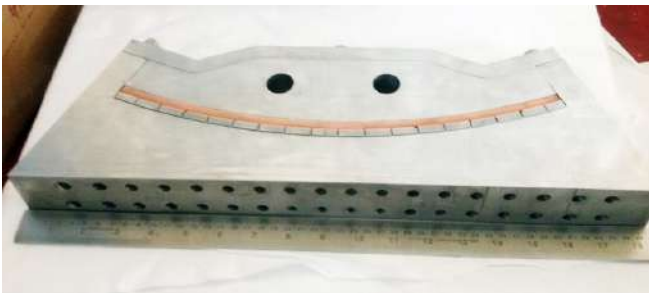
Assembly of fixtures, tungsten tiles and copper backplate to fabricate Curved Dome Structure using vacuum brazing technique.
